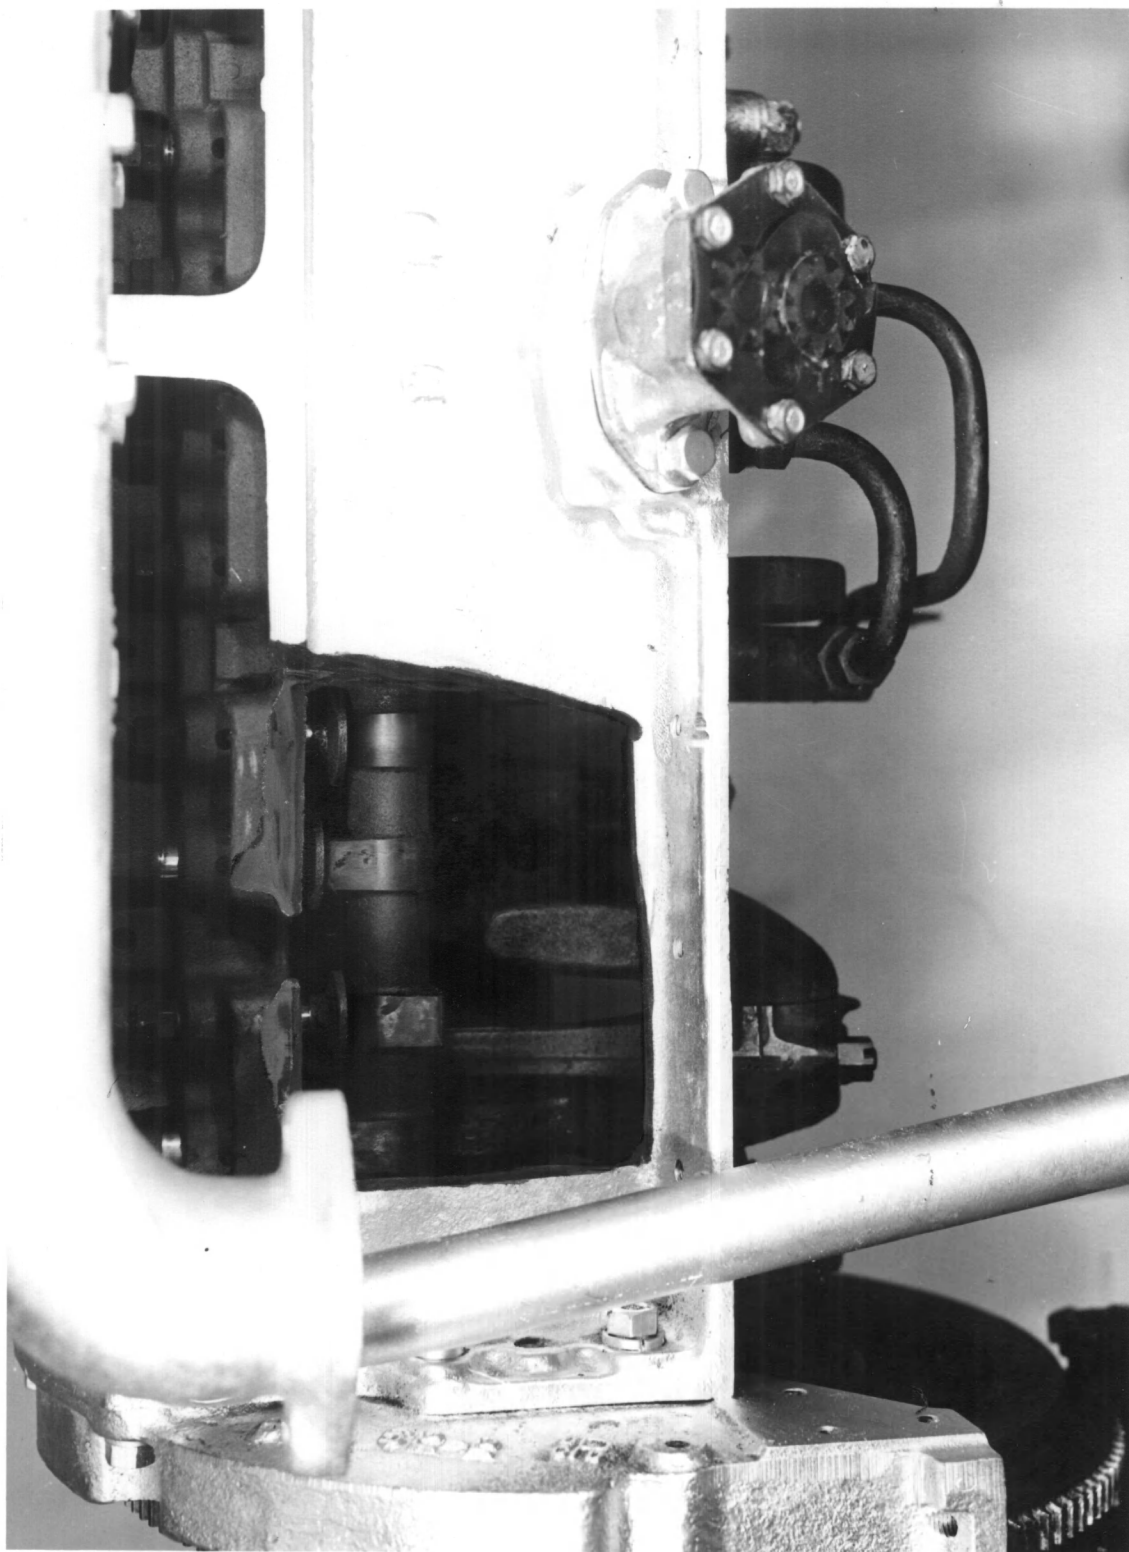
Illustration showing suggested cut to expose the engine cam shaft and valve tappets.
